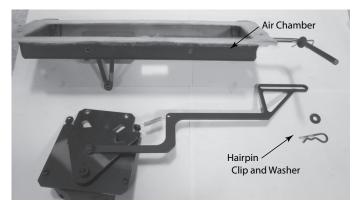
Removal of Hairpin Clip, Washer and Air Chamber
